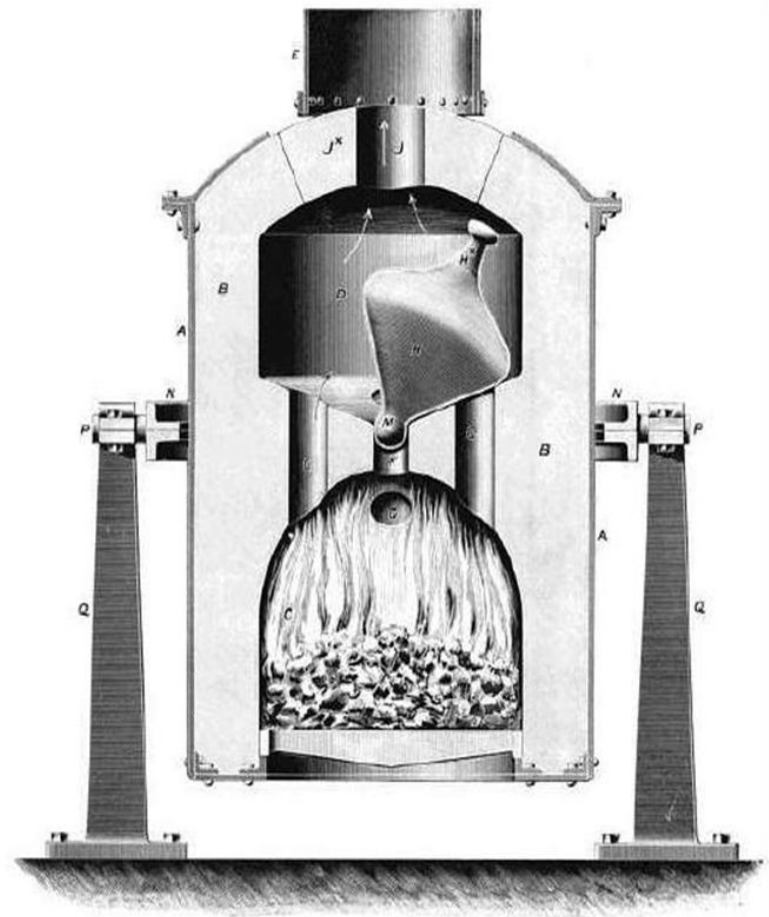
BESSEMER'S FURNACE FOR THE MANUFACTURE OF OPTICAL GLASS
